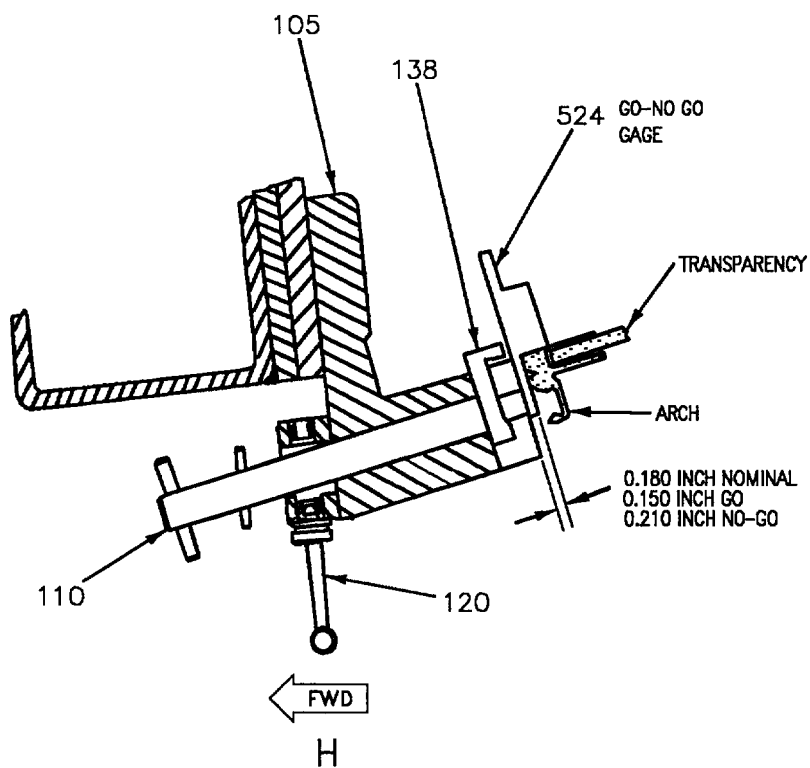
Inspection or Replacement - Arch (Sheet 5)
